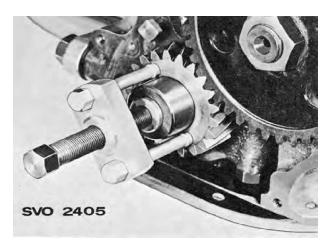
Removing the crankshaft drive (4-cyl. engine)
